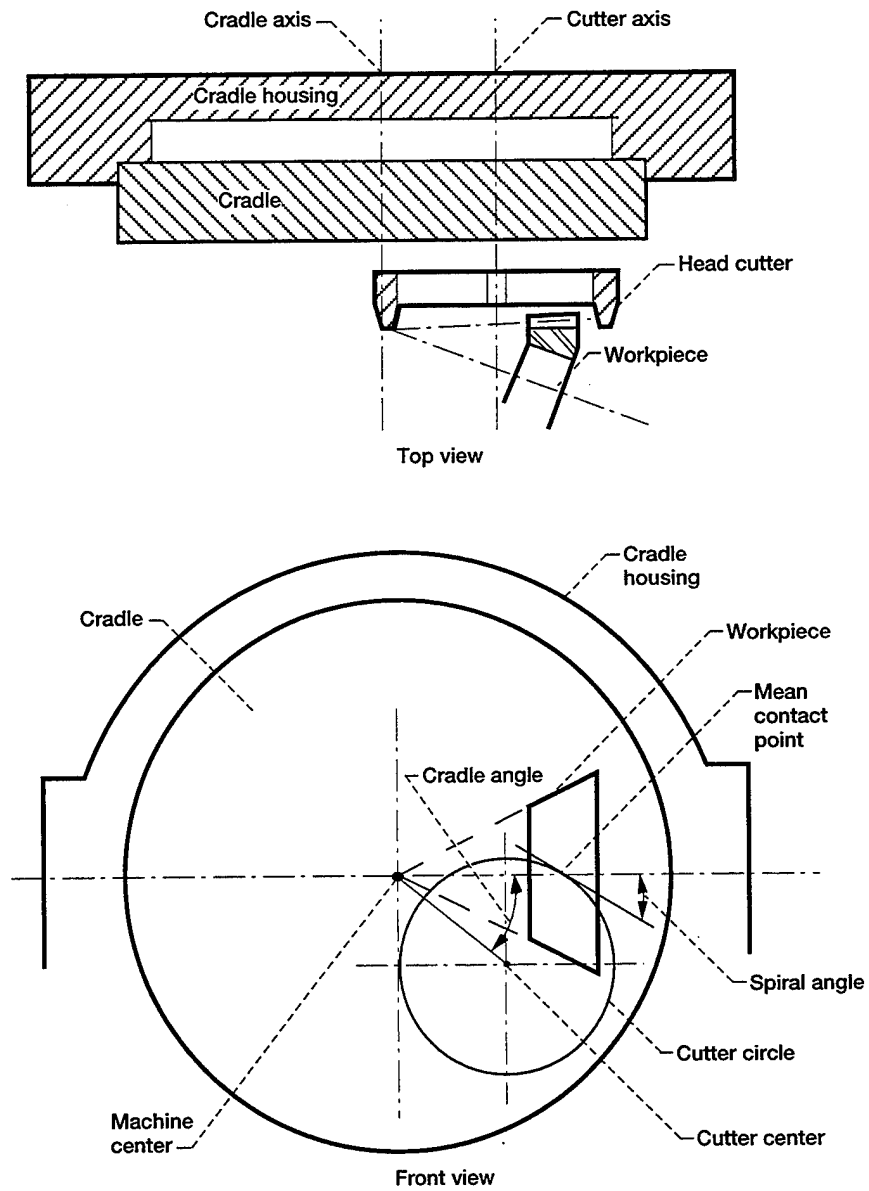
Orientation of workpiece to generation machinery.
